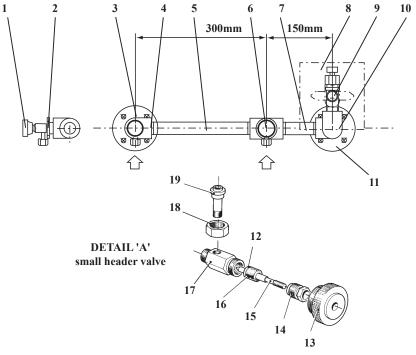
B HEADER MANIFOLDS — MULTI-CYLINDER
